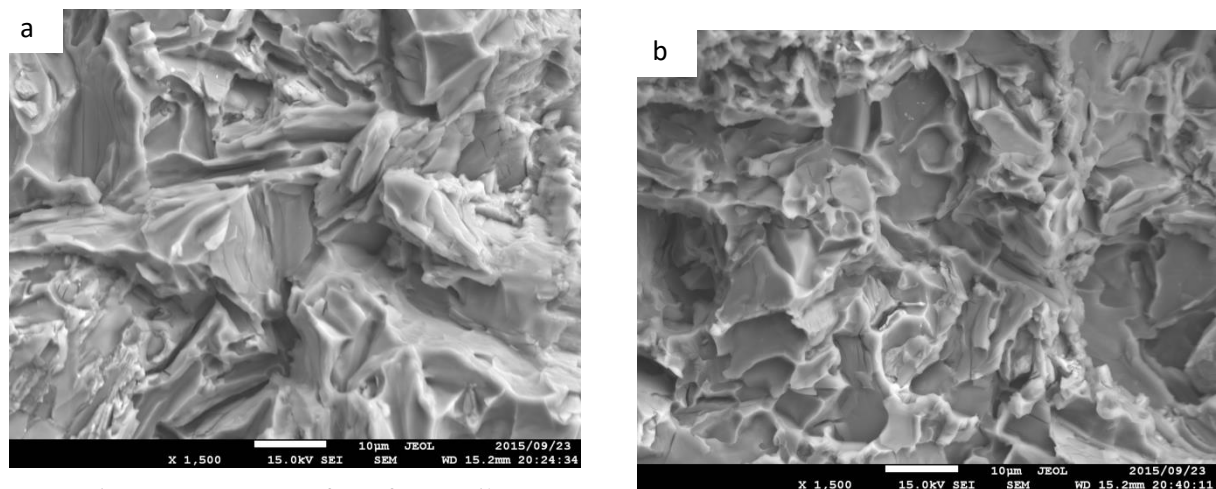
Fracture surface after tensile test: (a) sample I center bottom (b) Sample III side bottom
